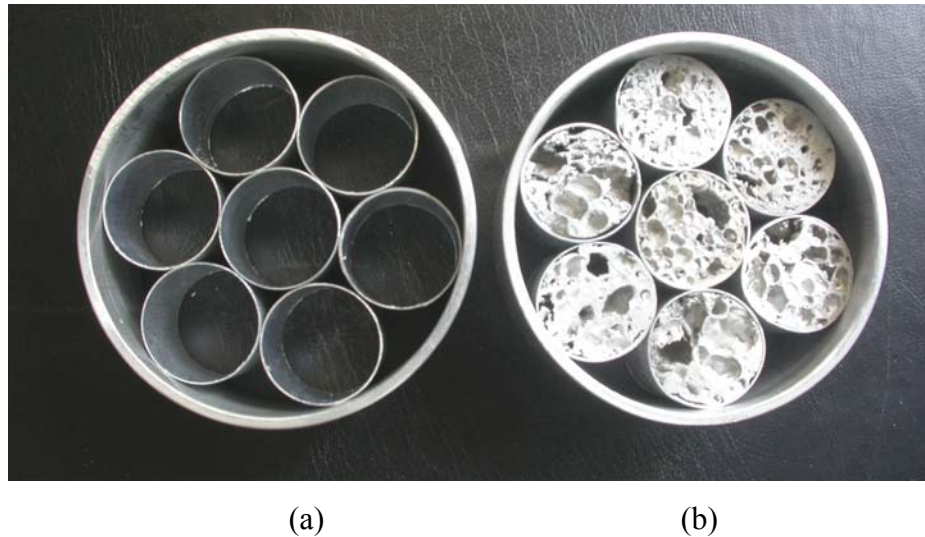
Hexagonal multi tube design (a) empty and (b) aluminum foam filled.
